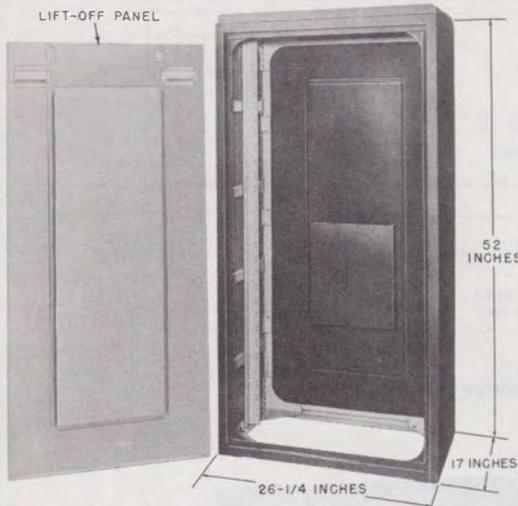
26-Plate Apparatus Cabinet Per ED-92185-70
